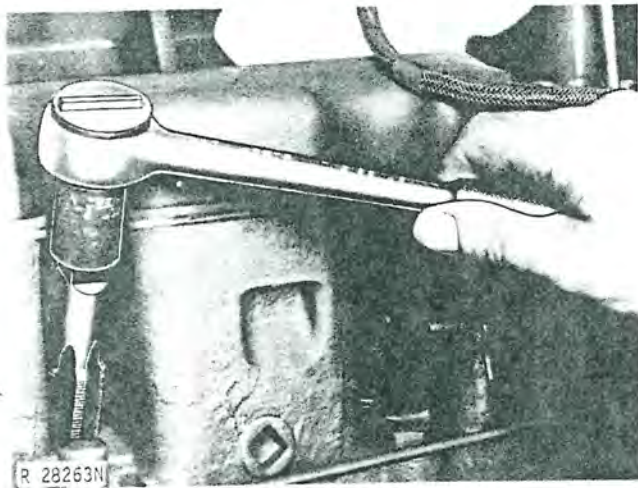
Using JDF-5 Tap To Clean Threads In Cylinder Head
